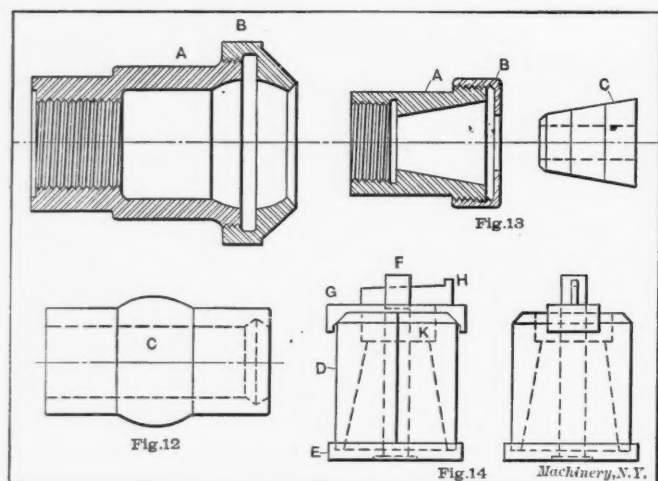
Simple Chuck in which Bearing *C* is bored. Fig. 13. Chuck for Boring Part *C*. Fig. 14. Babbitting Jig in which Part *C* is cast
